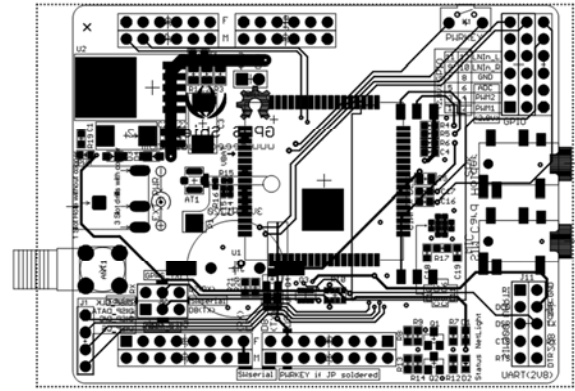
Showing the PCB diagram of the GSM/GPRS module.
